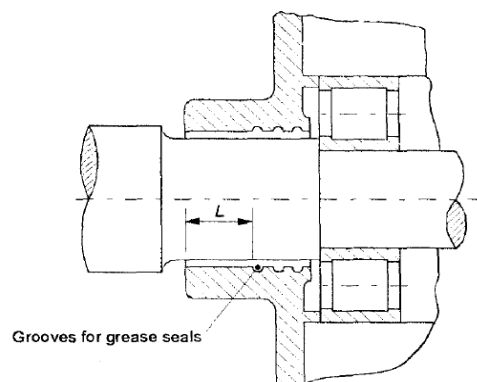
Cylindrical joint for shaft of rotating electrical machine
